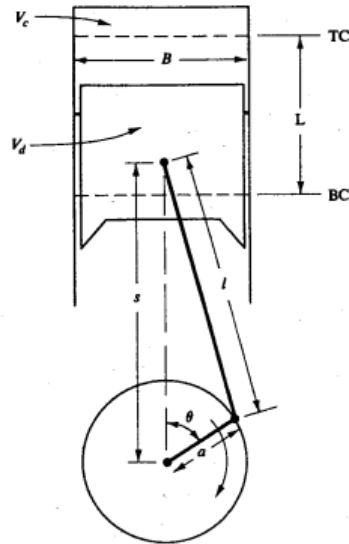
Geometry of cylinder, piston, connecting rod, and crankshaft where B=bore, L=stroke, l=connecting rod length, a=crank radius, θ =crank angle [1]
